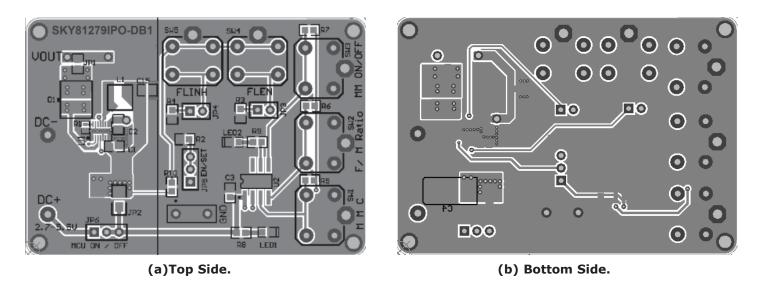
SKY81279 Evaluation Board Top and Bottom Side Layout.
